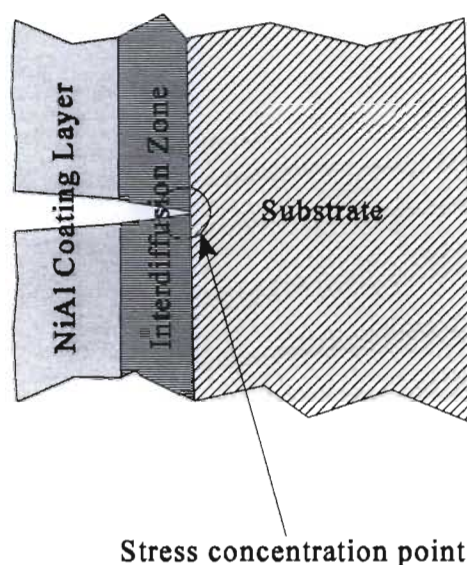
Brittle failure of aluminide coating due to mechanical loading
